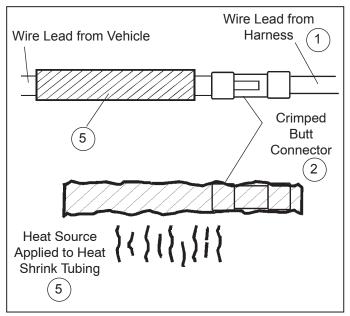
Splicing - Crimping Connector & Heating The Tubing
